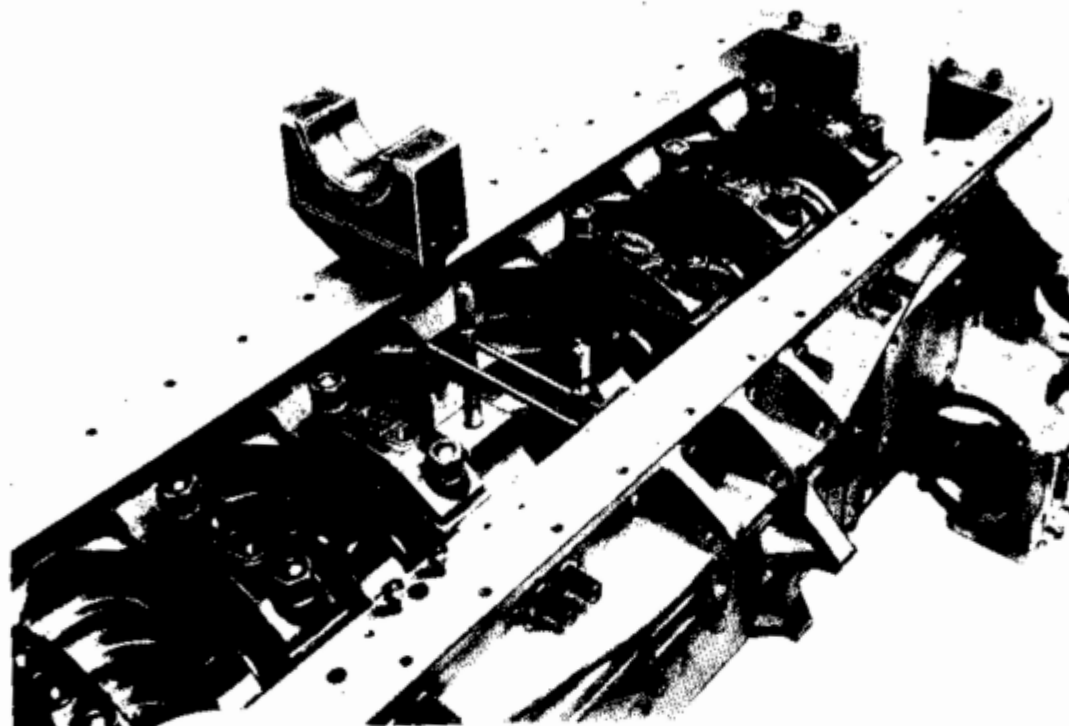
6LX Crankcase fitted with Gun Metal Main Bearings
